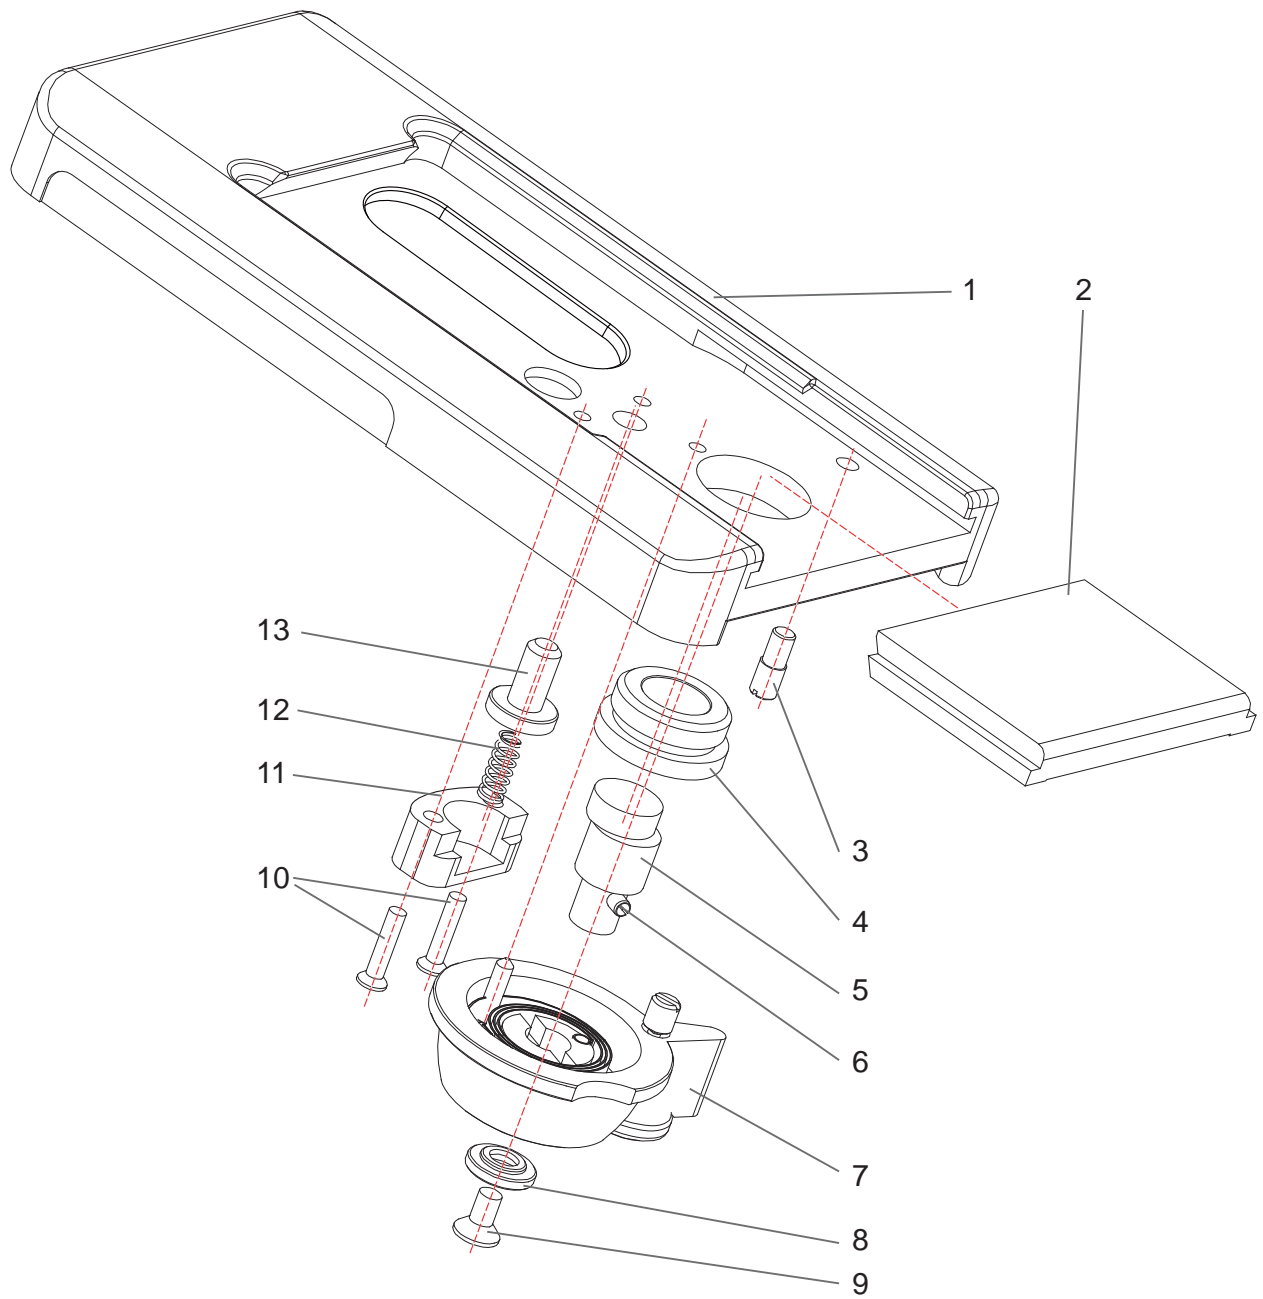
Reach 1 Fluid Head - Wedge Plate Unit Assembly
